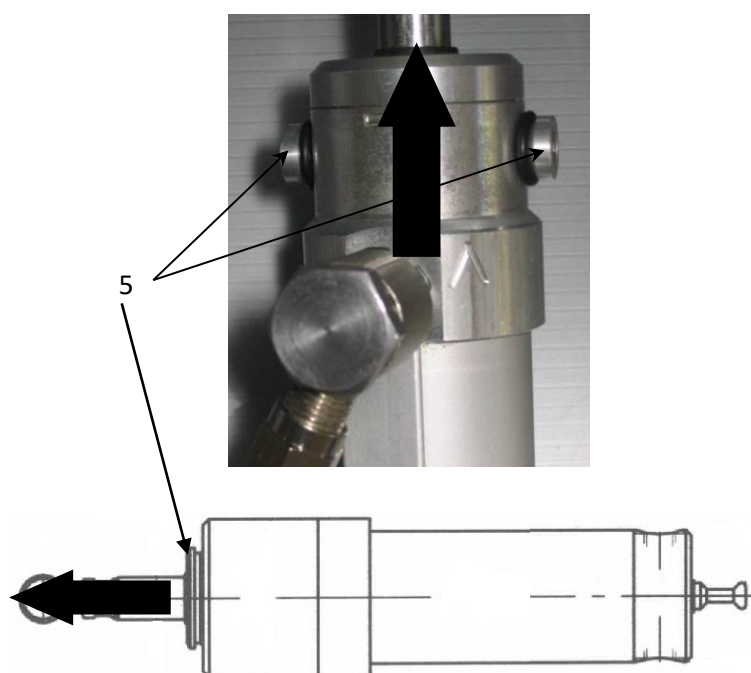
Unlocking the pneumatic cylinder: upper picture – PUAV type, lower picture PVZ type.
